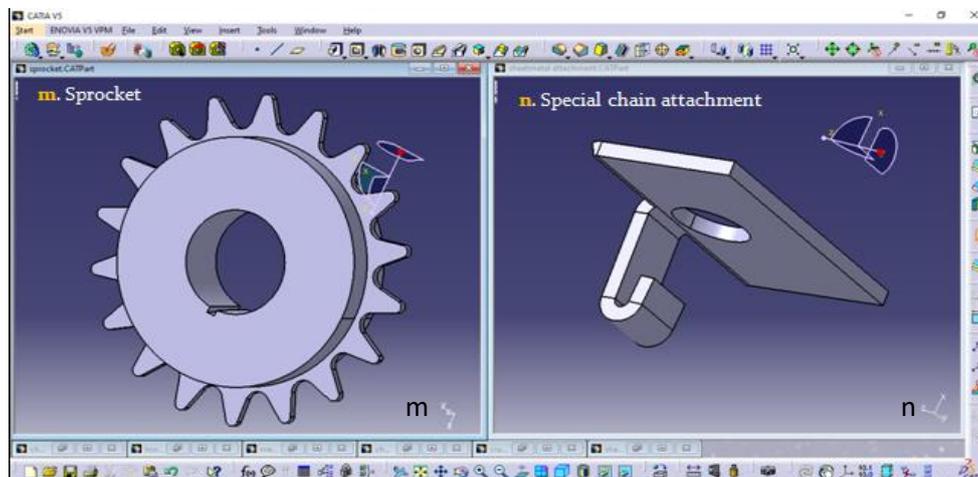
CAD models of parts m. Chain sprocket, n. Special chain attachment.
